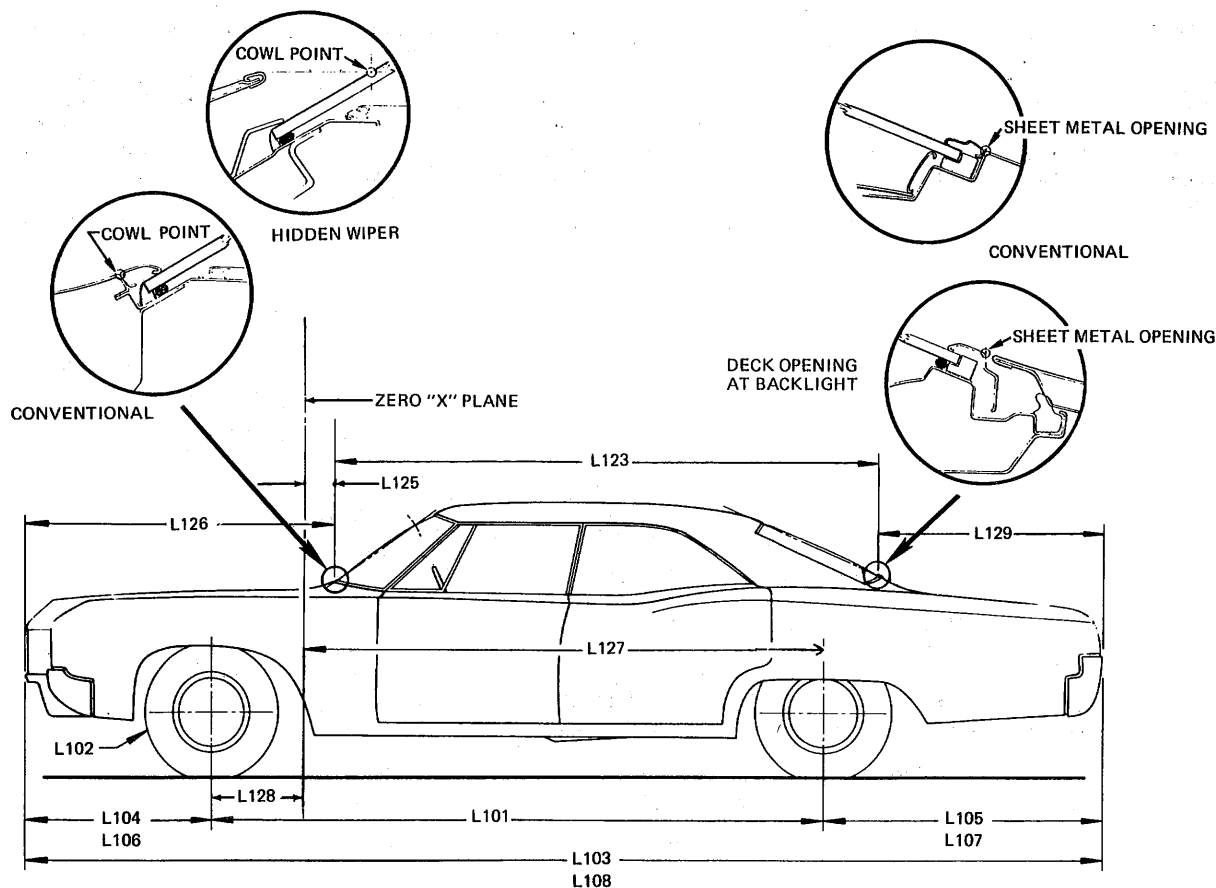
EXTERIOR DIMENSIONS, LENGTH
